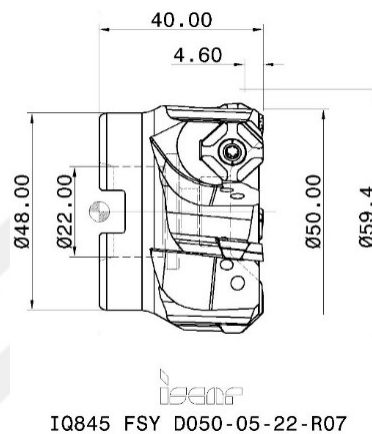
Technical dimensions of the milling cutter<sup>84</sup>
